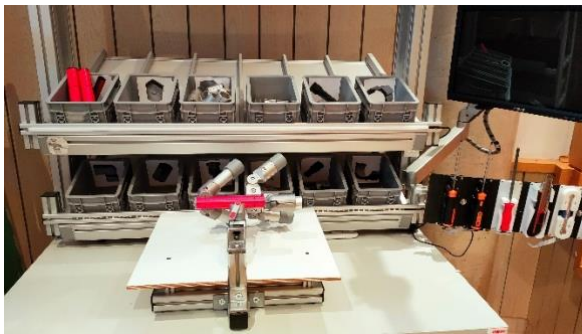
Dog-Shaped assembly with mounting at the manual work station.
